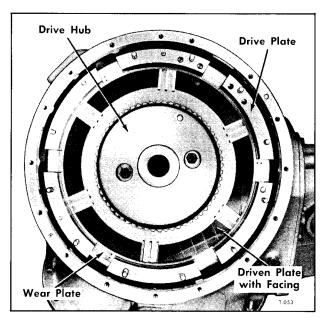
Drive Plate with Wear Plate and Driven Plate Assembly Installed
